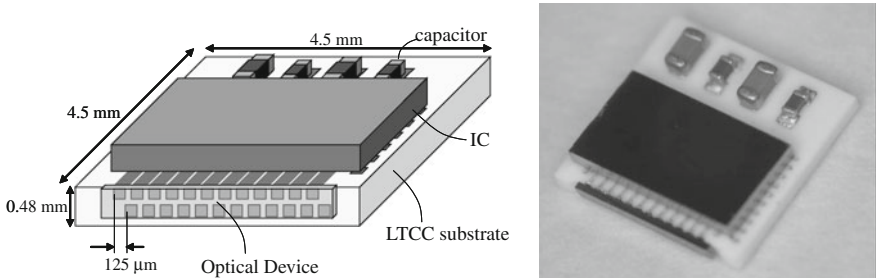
Left: Drawing of NEC 12 channel parallel link module on LTCC substrate showing dimensions. The VCSELs are mounted on the edge of the LTCC, right: picture of the module [58] (reprinted with permission from JIEP)
